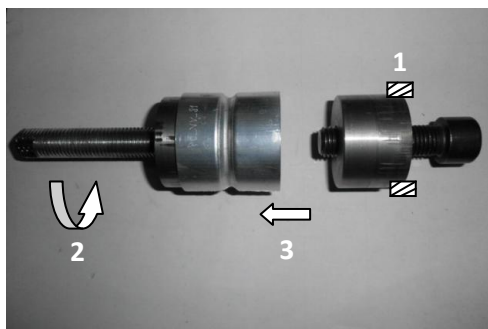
1. The second cylinder is clamped in a bank screw, 2. The first rod is turned further into the first cylinder again, 3. The second cylinder is pushed out of the deformed tube.
